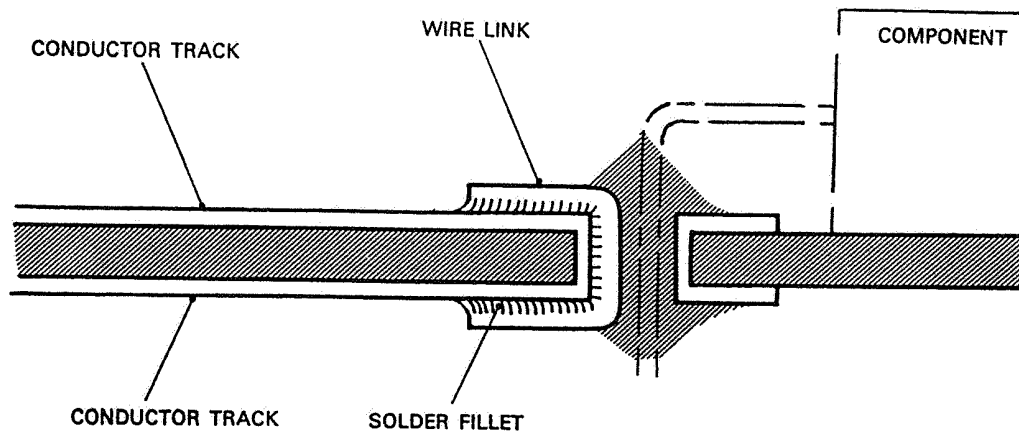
WIRE LINK REPAIR OF DEFECTIVE PLATED-THROUGH HOLE
